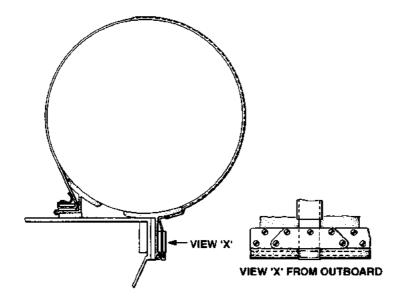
6.5m RIB - Buoyancy Tube Securing Arrangement
